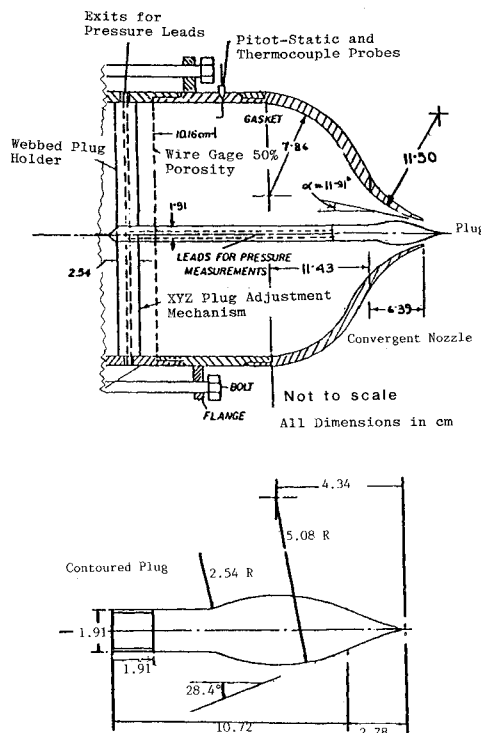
Plenum chamber, plug mounting assembly, and plug geometry.
